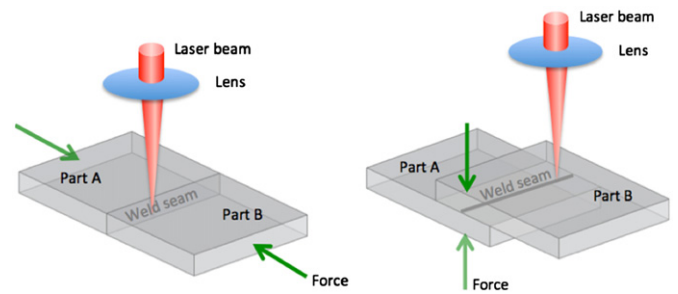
Experimental arrangements of parts for butt-welding (left) and transmission welding (right).
